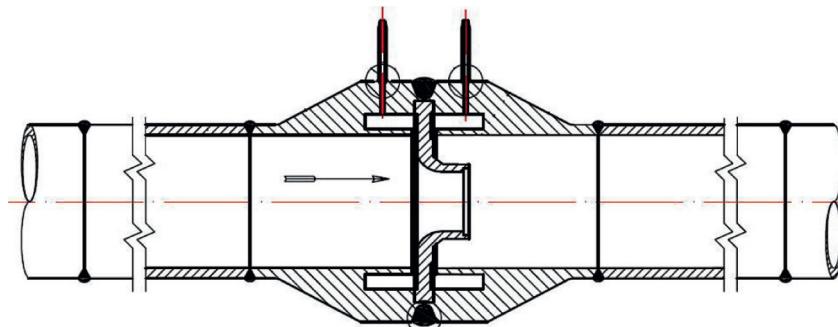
Two-dimensional drawing of nozzle flowmeter.
